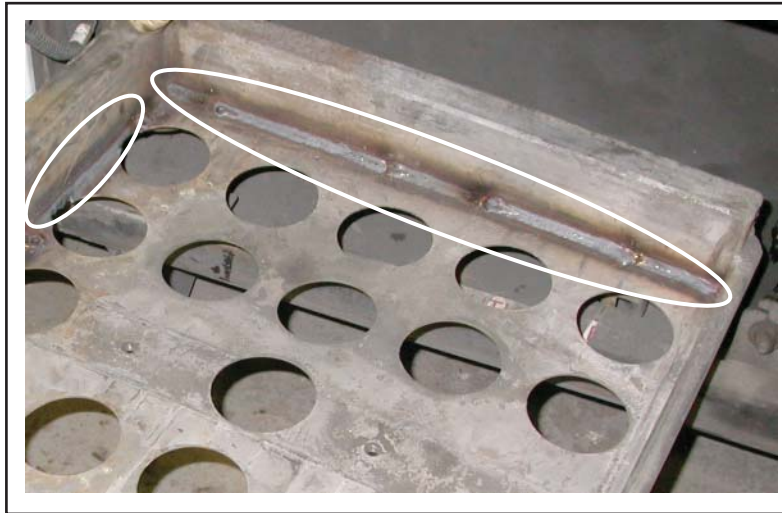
Bottom Plate Completely Welded to the Tray Frame
